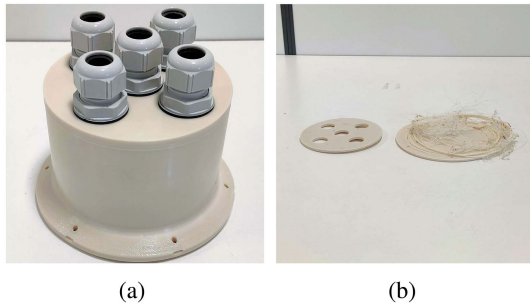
(a) Bottom picture of smart buoy's shell, containing cable glands. (b) Picture of failed prints, left: warping, right: material not sticking to print.
